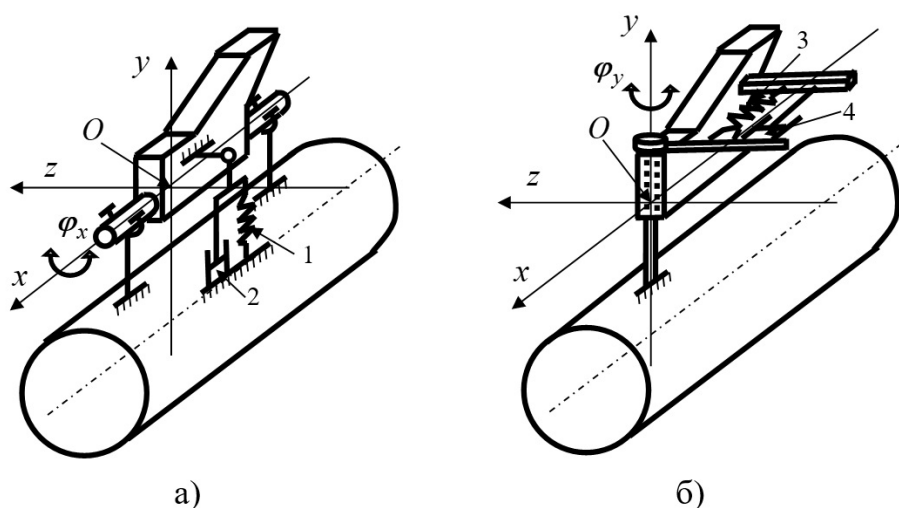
Constructive diagram of the engine mounting units on the pylon:
